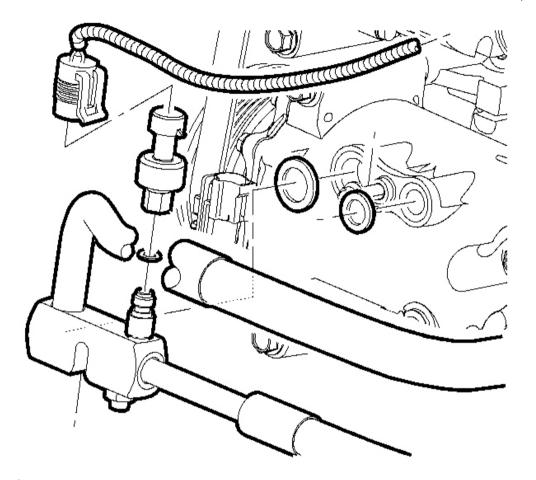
Compressor Hose, Nut & TXV Courtesy of GENERAL MOTORS CORP.
